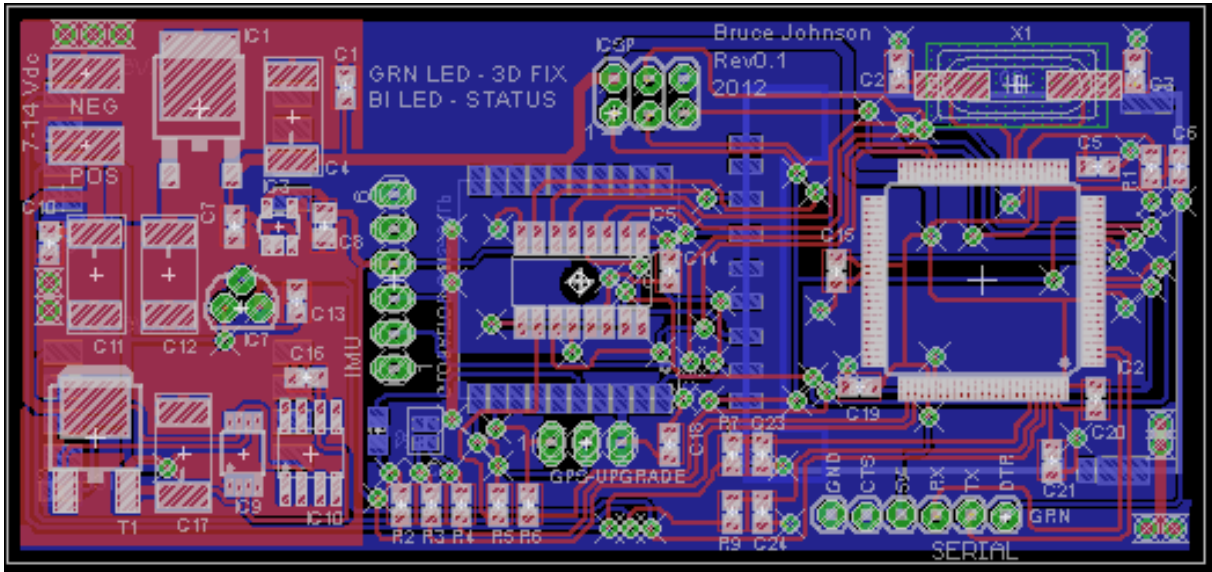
Completely integrated logger printed circuit board layout - Complete view
